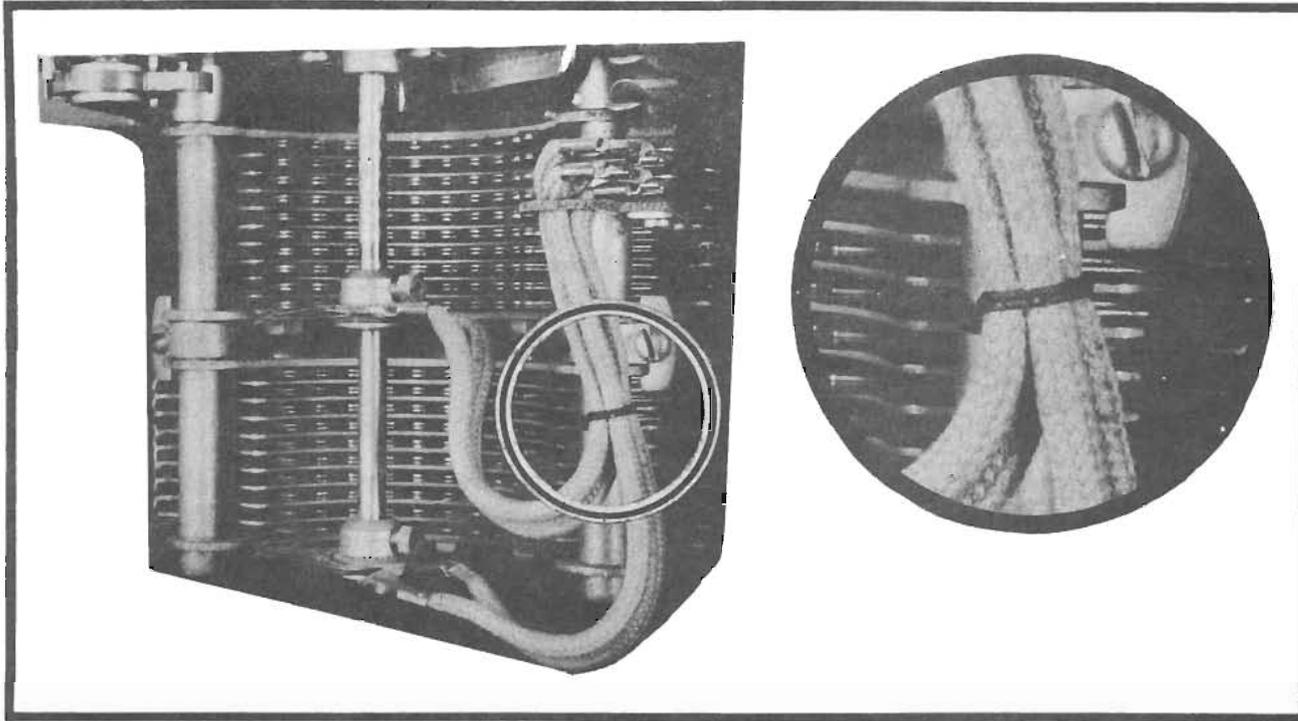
Example of a Switch that is Not Equipped With Wiper Cord Bracket, With the Wiper Cords Properly Tied.
